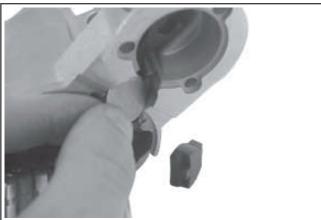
Removing Backing Plate and Pivot Bushing.
